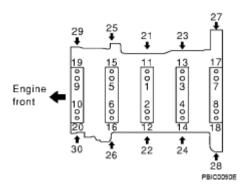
Identifying Main Bearing Caps Bolt Tightening Sequence
